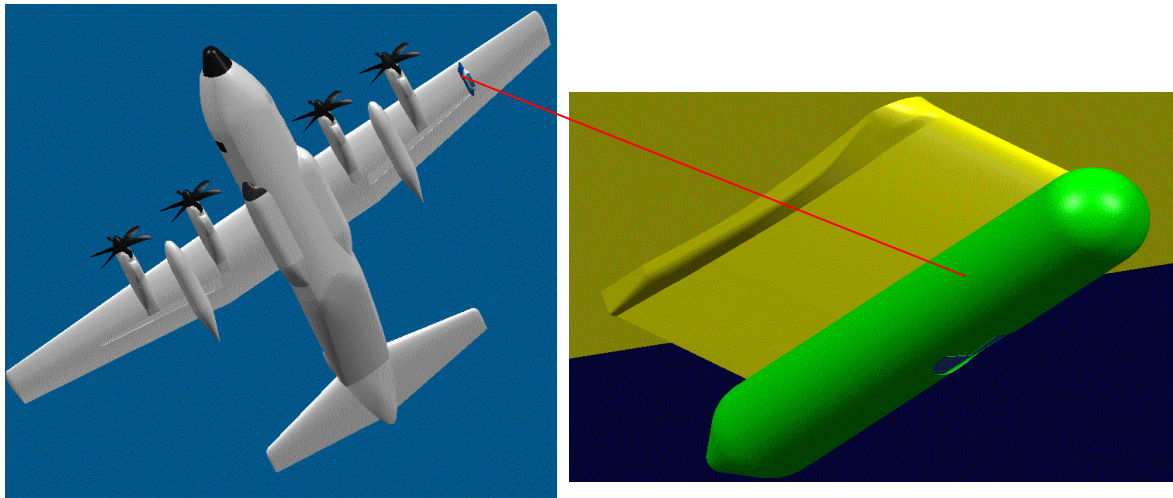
Wing Installation, Pod/Pylon Mounted SFMR
